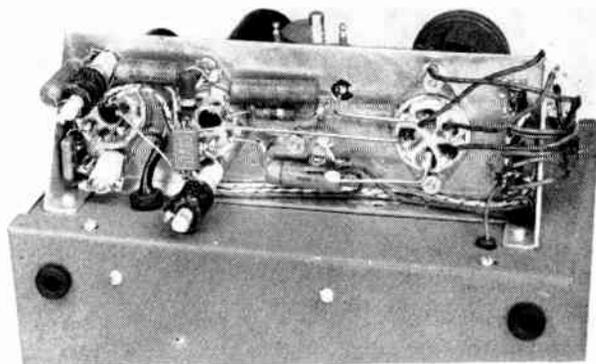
Wiring underneath the shelf. The loose flexible leads at the right are anchored to a lug strip on the chassis after assembly.
